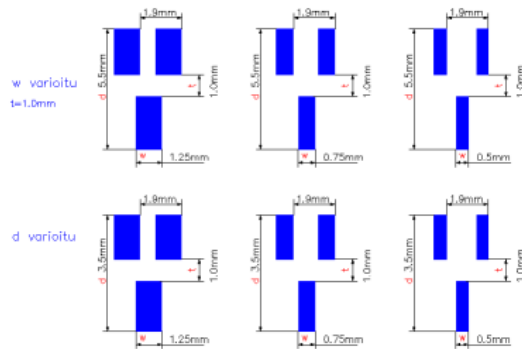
Sample pattern testing board (Technical Research Centre of Finland)
